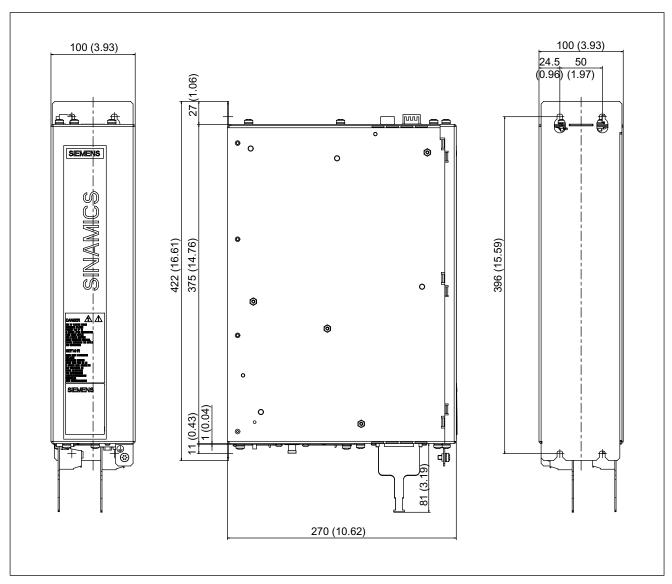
Dimension drawing of Active Interface Module 16 kW, all dimensions in mm and (inches)
